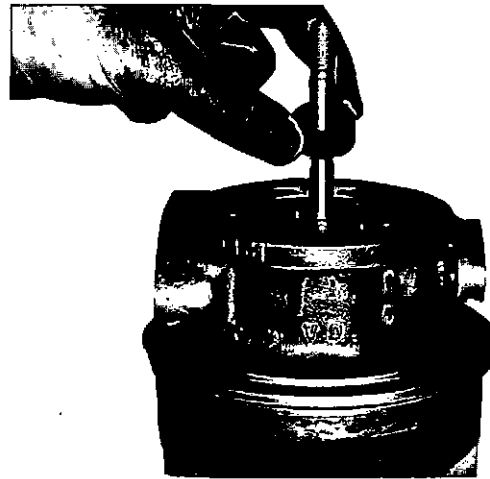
, (TA29). Installing the bearing (compressor end)
